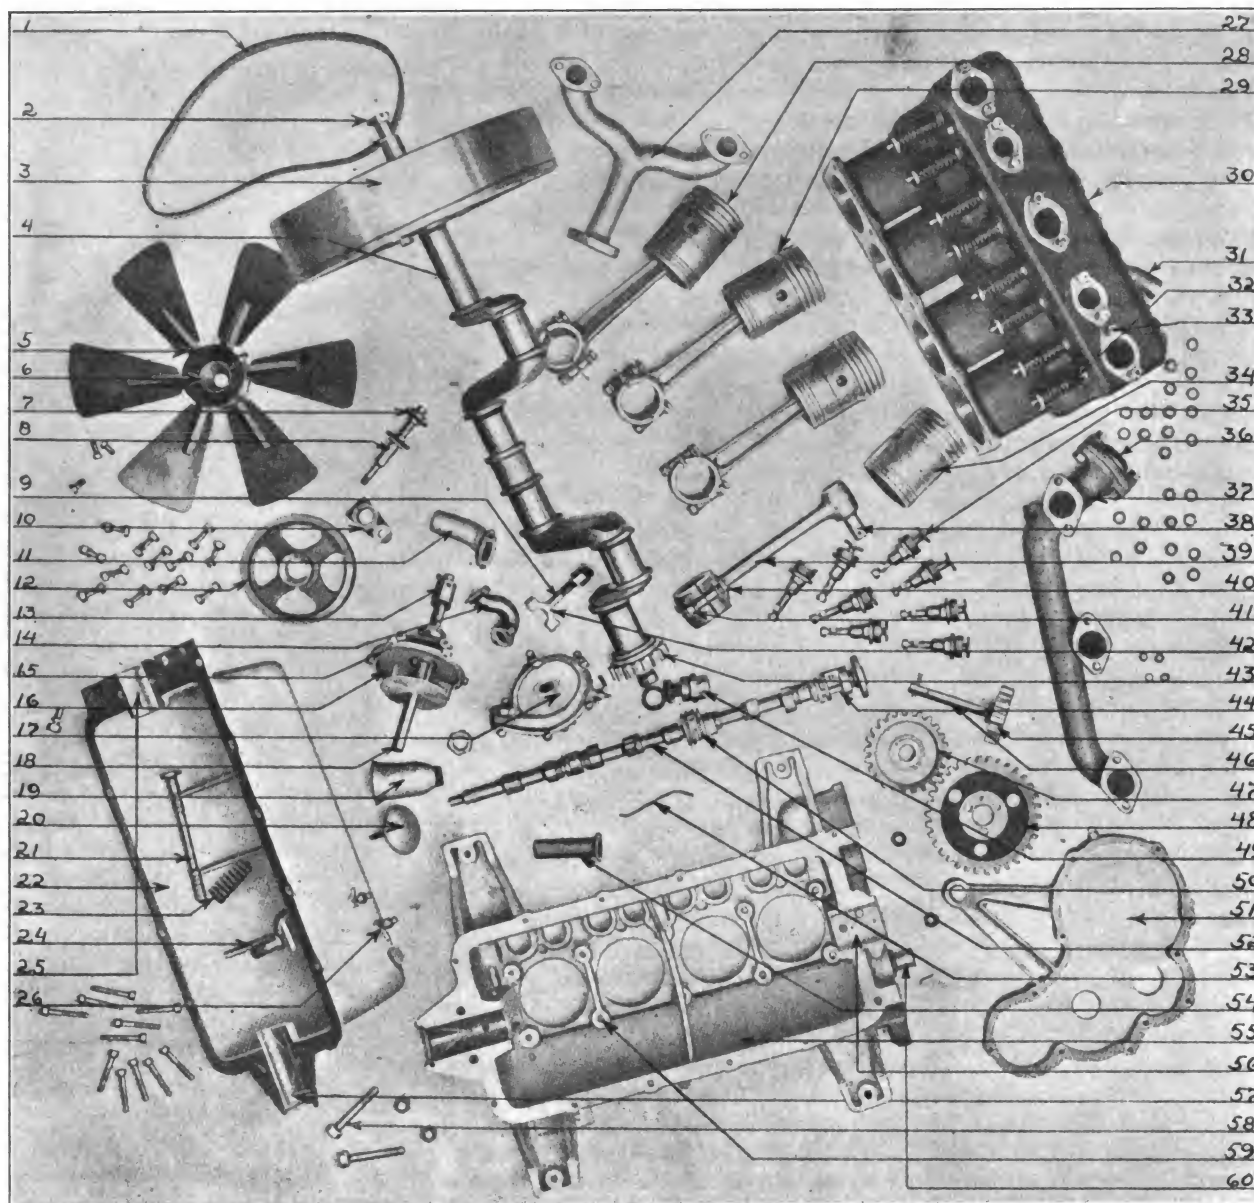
MOTOR PARTS BEFORE ASSEMBLING.
